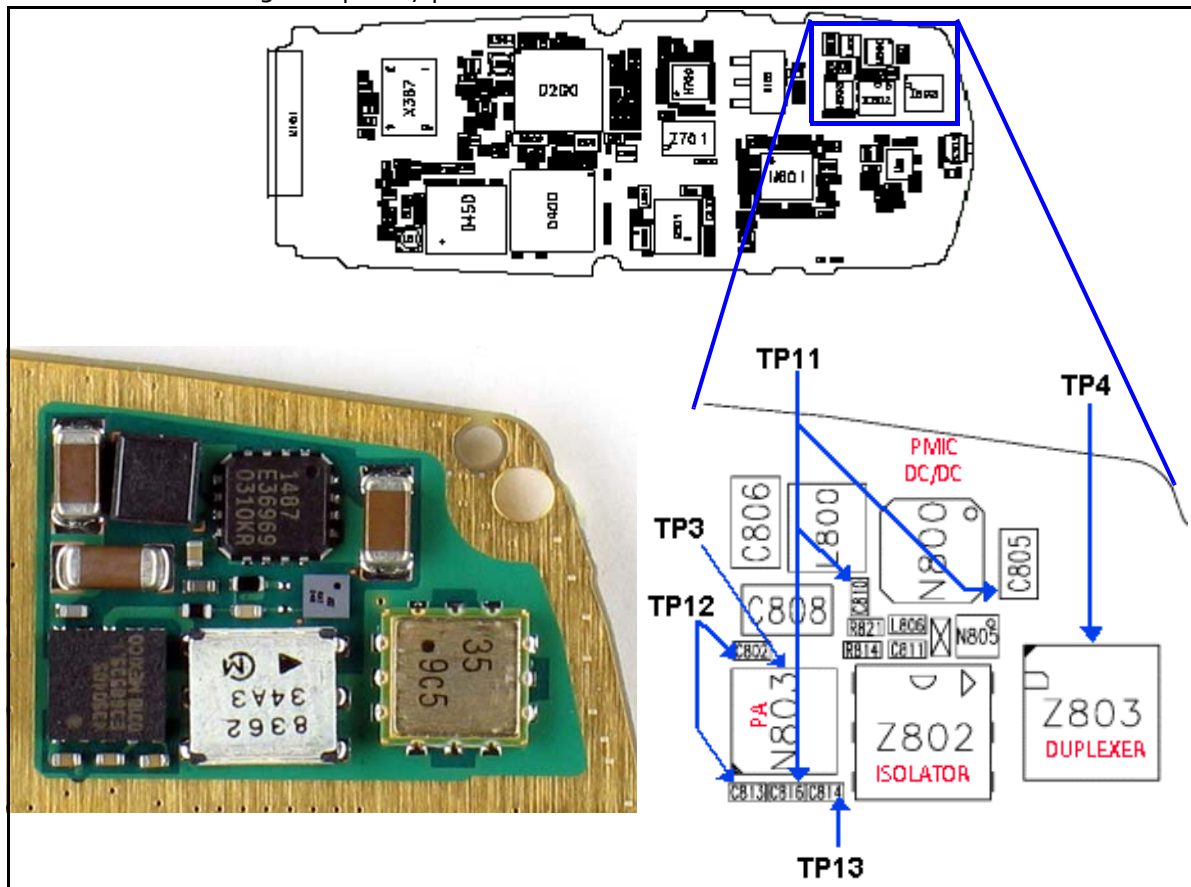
(Top) PWB. (Bottom left) A zoomed view of the testing points on the PA section. (Bottom right) A zoomed view of the PA section with part numbers.
